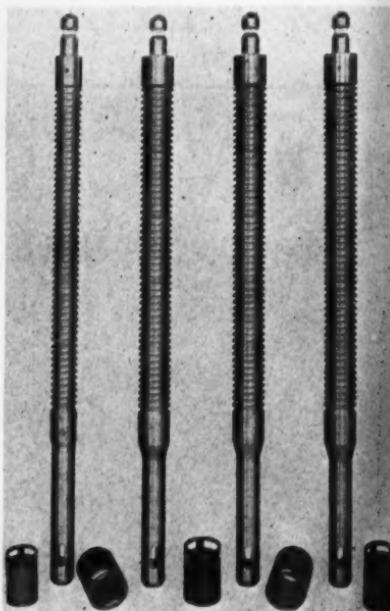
Oilgear Cyclematic Broaching Tools and Work-Pieces
